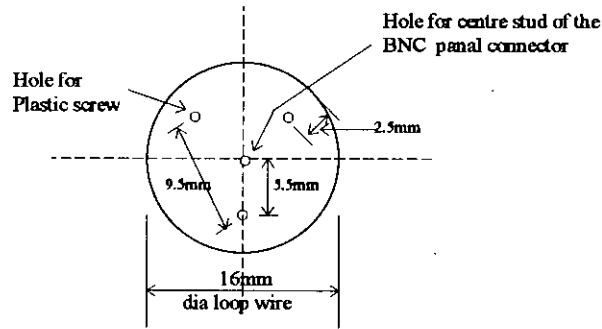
(b) *Dimensions and screw positions of the hexad loop.
